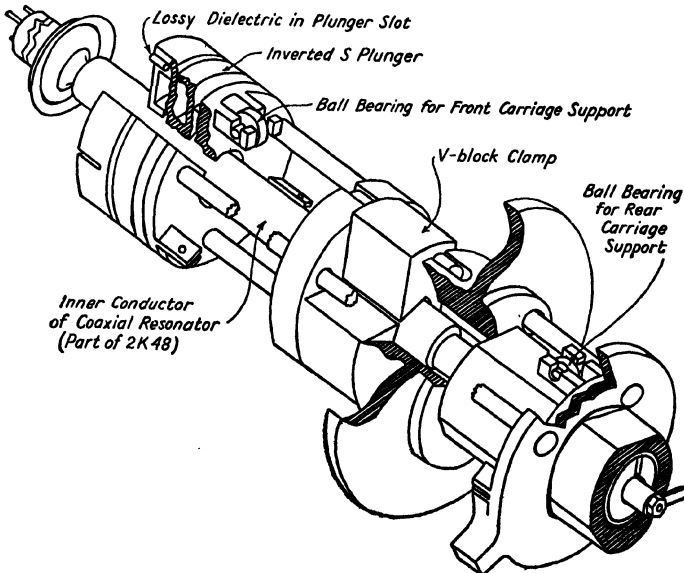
Sectioned view of plunger, carriage, and V-block clamping 2K48 tube in position.
